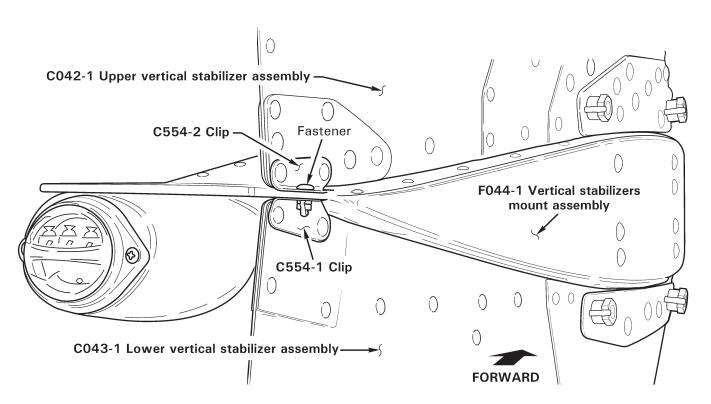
F004-2 EMPENNAGE ASSEMBLY
